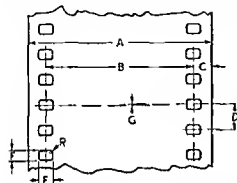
STANDARD 35 MM. FILM. CUTTING AND PERFORATING DIMENSIONS OF NEGATIVE AND POSITIVE RAW STOCK, APPLYING TO MATERIAL IMMEDIATELY AFTER CUTTING AND PERFORATING.
